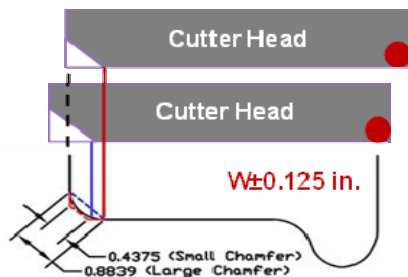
Lateral Position of Cutter Head Position Affects Chamfer Size
